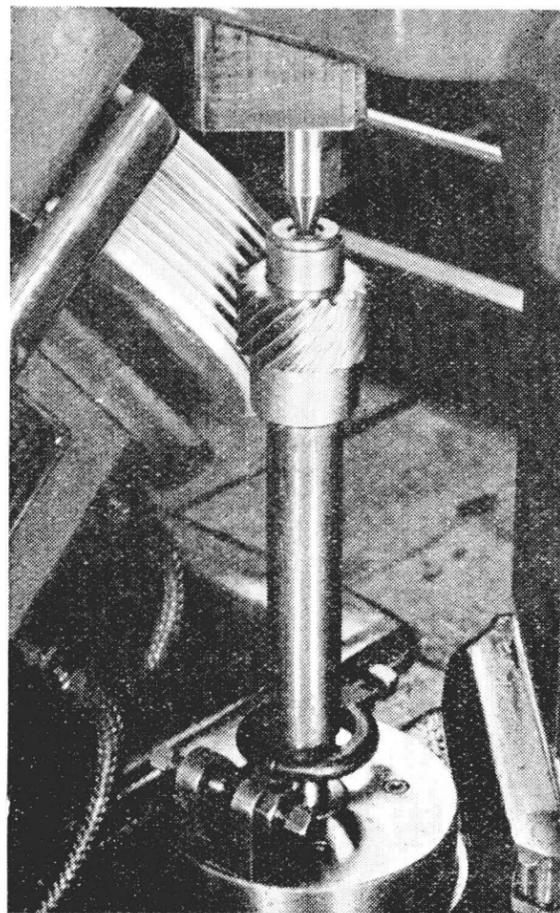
The Coventry Gauge and Tool No. 40 gear grinder set up for a steeply helixed wheel
